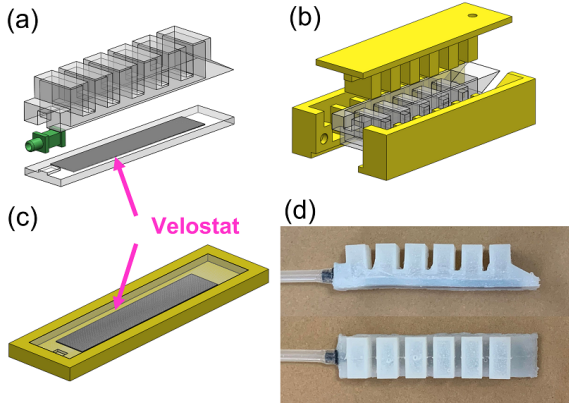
(a) The exploded view of the soft actuator. Both (b) and (c) show how the upper and lower components are manufactured by two different molds. The appearance of the soft actuator is shown in (d).
